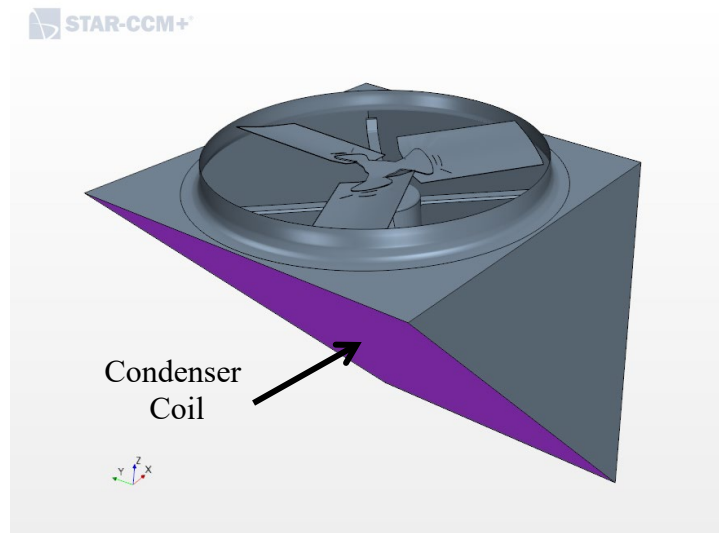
Condenser coil, casing, motor, mounting mechanism, fan and orifice plate geometry representation with a pressure jump inlet for the coil indicated in purple.
